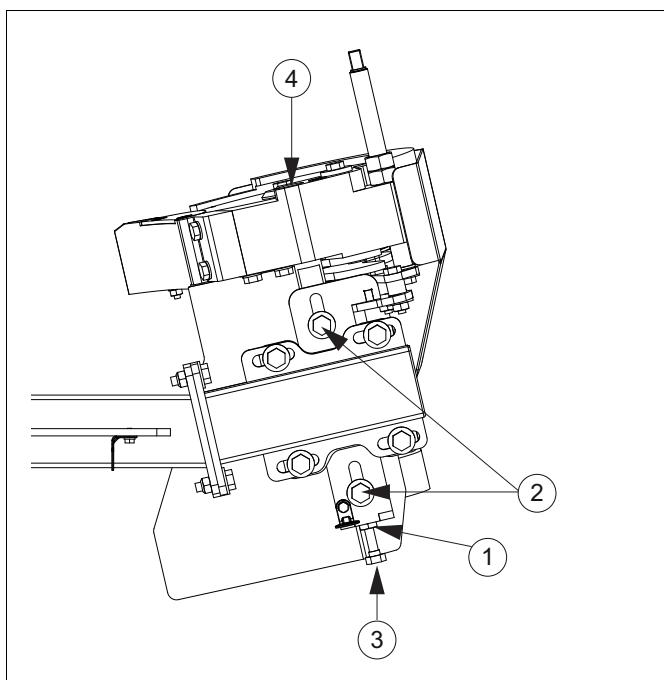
Adjust Neck Skin Cutting Module - 30mm vertical rod
